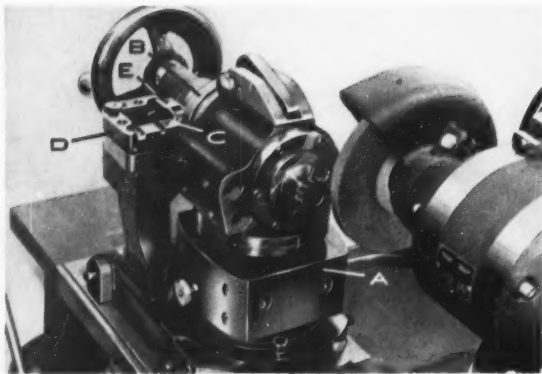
A "Royal Oak" universal form-relieving fixture set up for radial relief only
